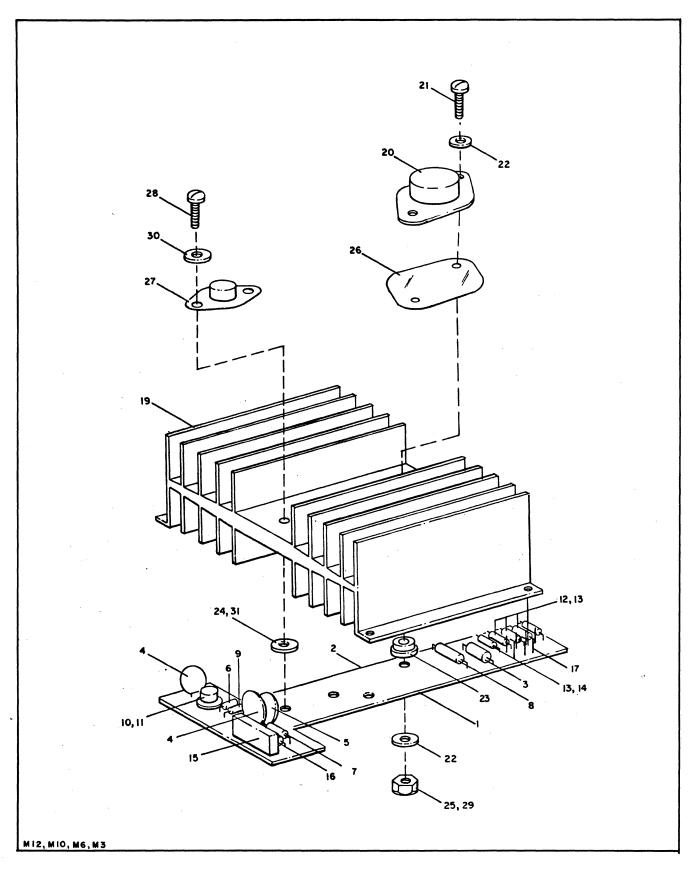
POWER SUPPLY ASSEMBLY
